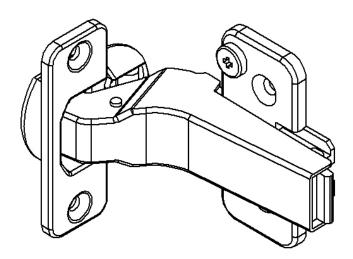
Hinge Unclipped Parts: Clip and Mounting Plate
